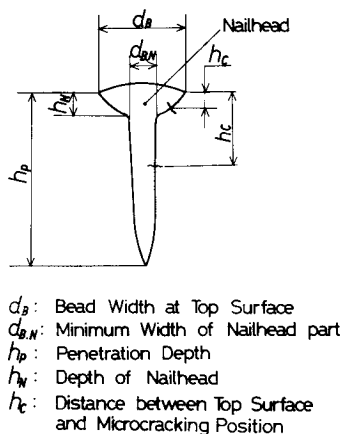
Electron Beam Weld Geometry Defined
